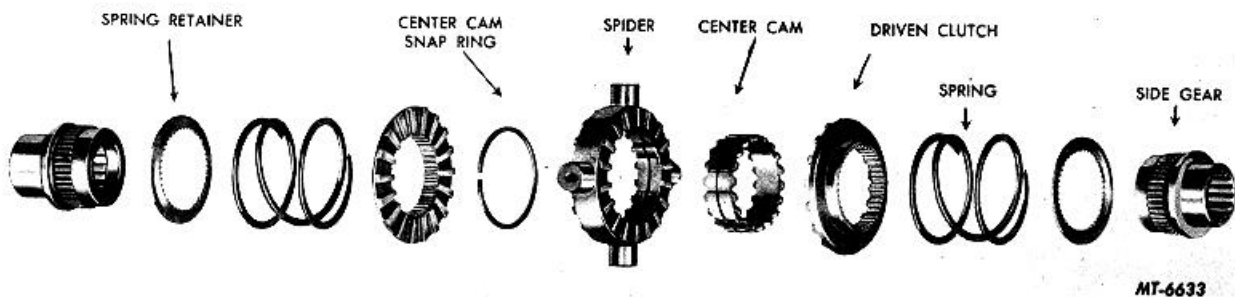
External Spring Design Differential Locking Unit (Exploded View)
